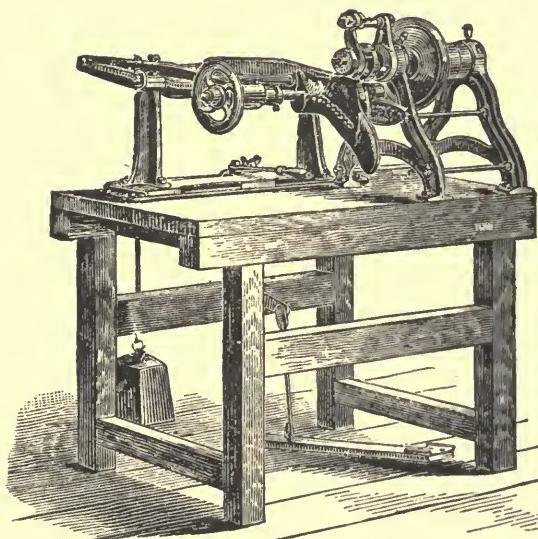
EUREKA HEEL-TRIMMING MACHINE.
